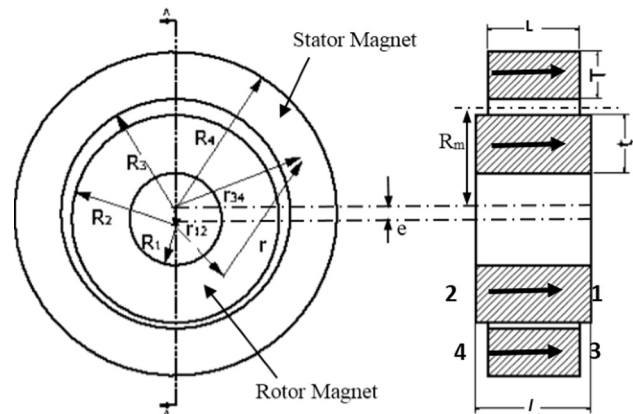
Radial Magnetic bearing: (a) front view and (b) section side view
